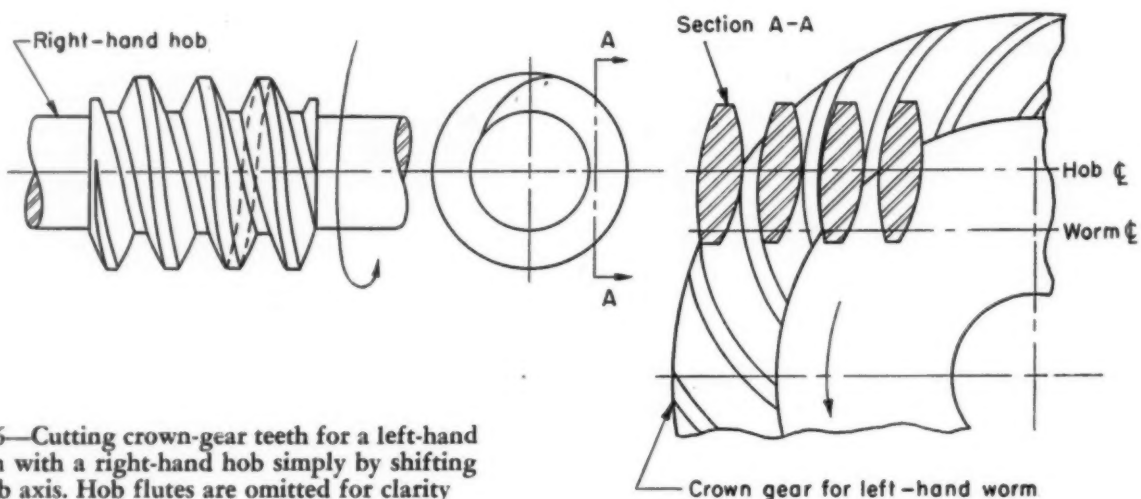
Cutting crown-gear teeth for a left-hand worm with a right-hand hob simply by shifting hob axis. Hob flutes are omitted for clarity
